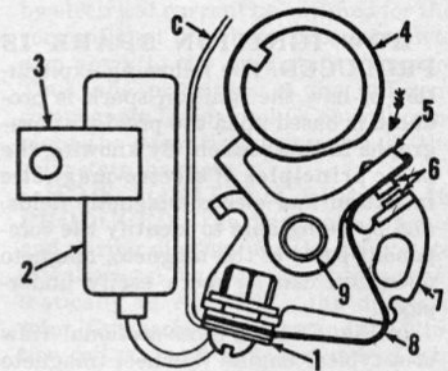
Typical flywheel magneto breaker point unit. Cam (4) is driven by engine crankshaft. Breaker arm spring (8) connects insulated contact point on breaker arm (5) to terminal (1).
